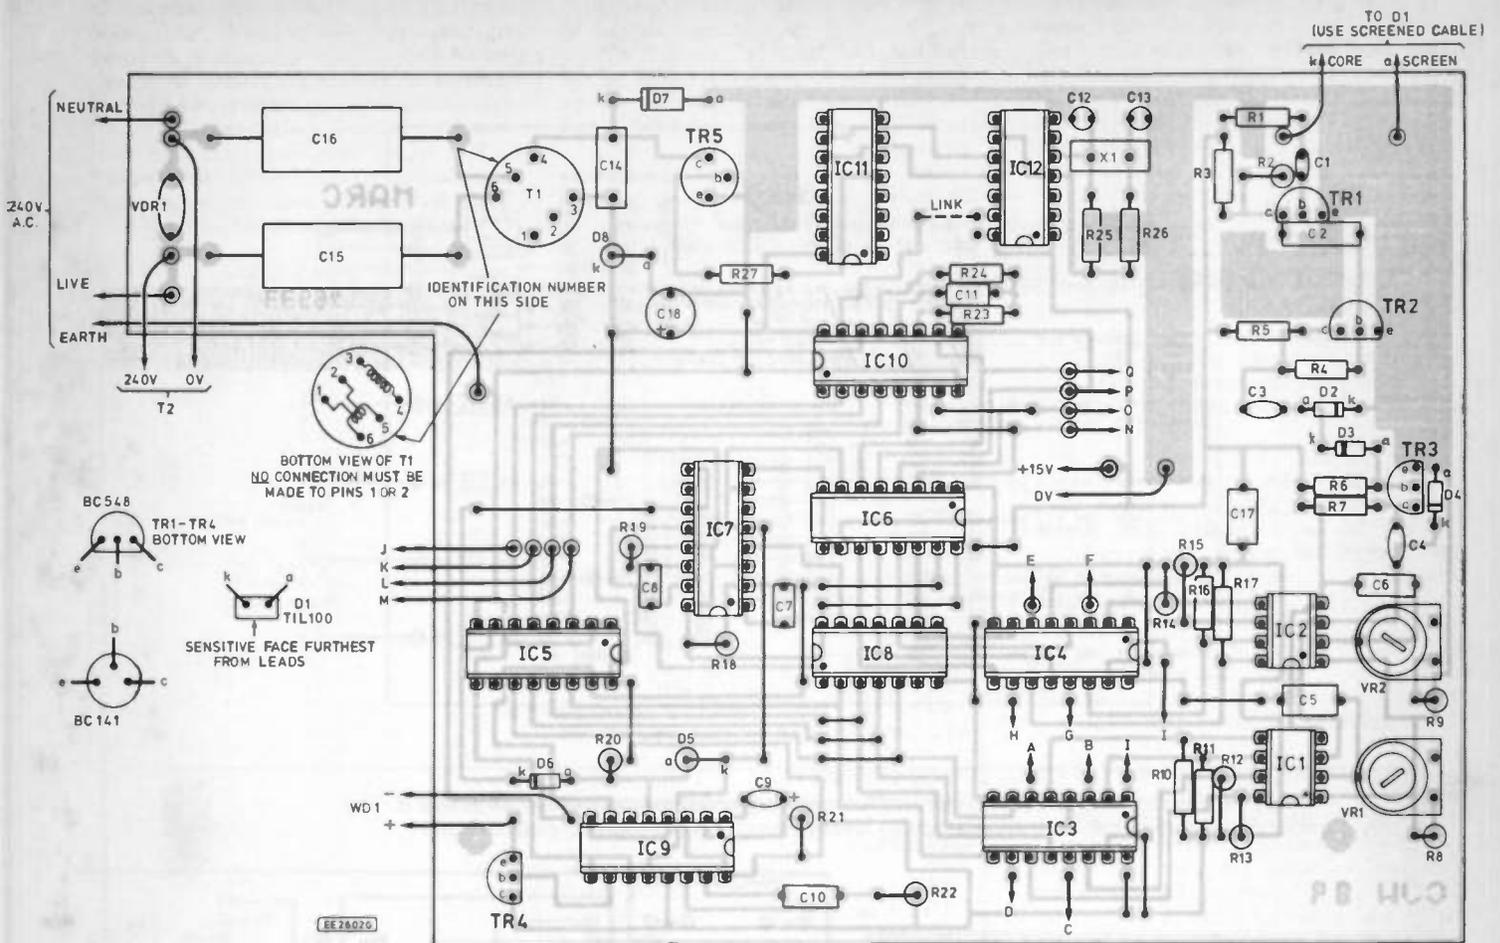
Component layout and full size printed circuit board copper foil master pattern for Board A. The four inset diagrams to the left of the component layout give the connection details for the impedance matching transformer T1, the transistors and the infra-red sensitive diode D1. Diode D1 should be connected to the board using a screened lead.
